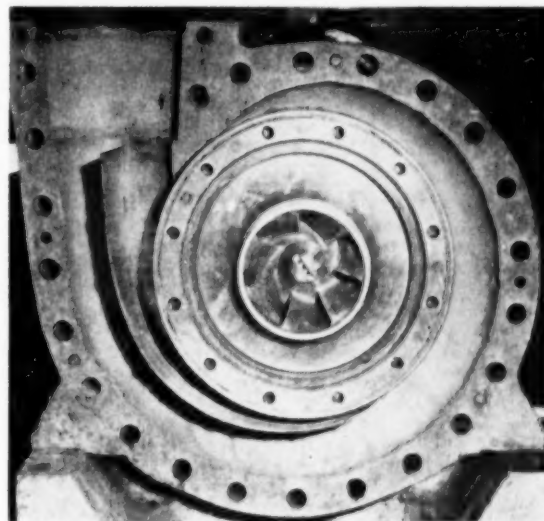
GRAND COULEE MODEL PUMP WITH HALF OF CASING REMOVED SHOWING IMPELLER, DIFFUSER RING, AND SEPARATING RIB
